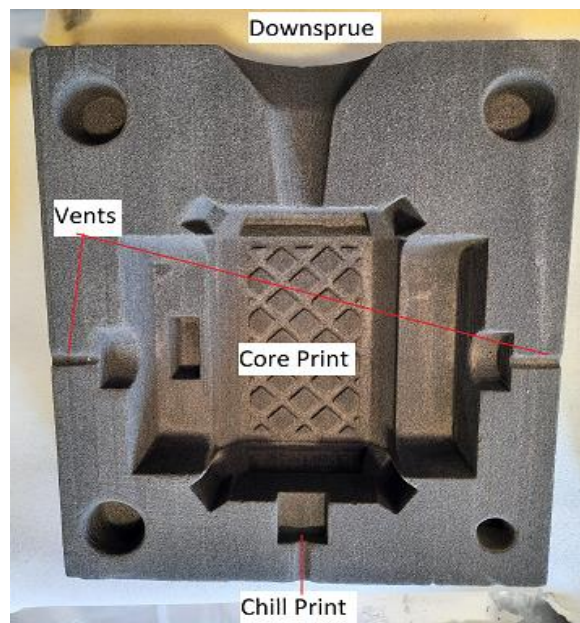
One half of the mold with the gating and core prints made on the Veridis printer.
